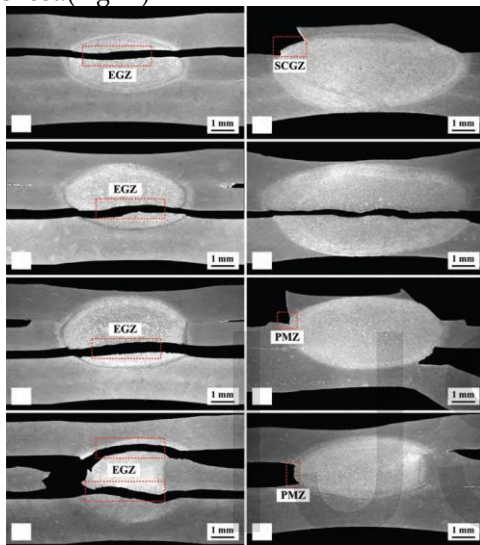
Macrostructures of weld joints in 1.5/1.0/2.0 mm stack
